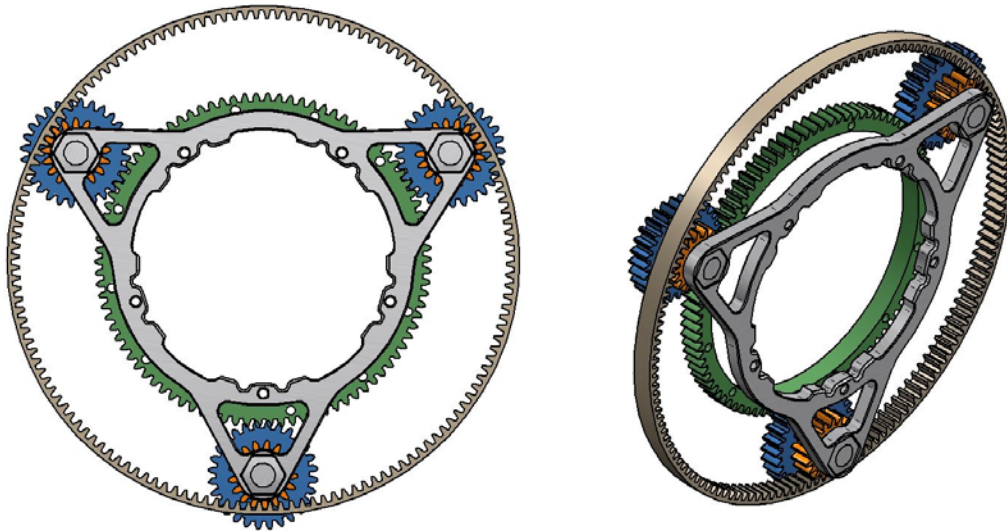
Color coded planetary gear. The blue planet gears are the first stage of engagement to the sun gear, they power the orange secondary set of gears which engages the ring gear.
